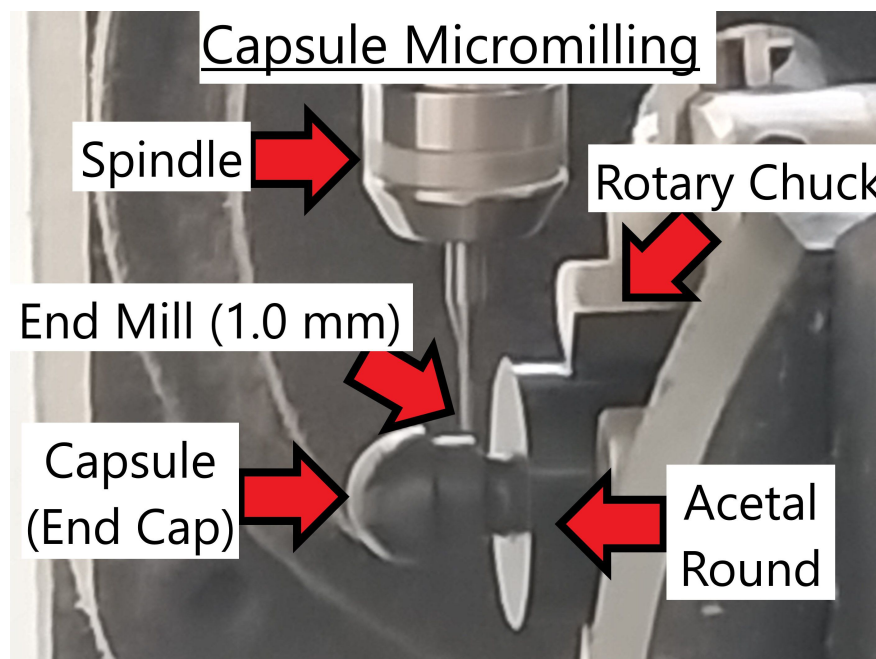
How capsule bodies are produced using the Minitech[®] micromill using Sutton Tools[®] 3.0 and 1.0 mm end mills.
